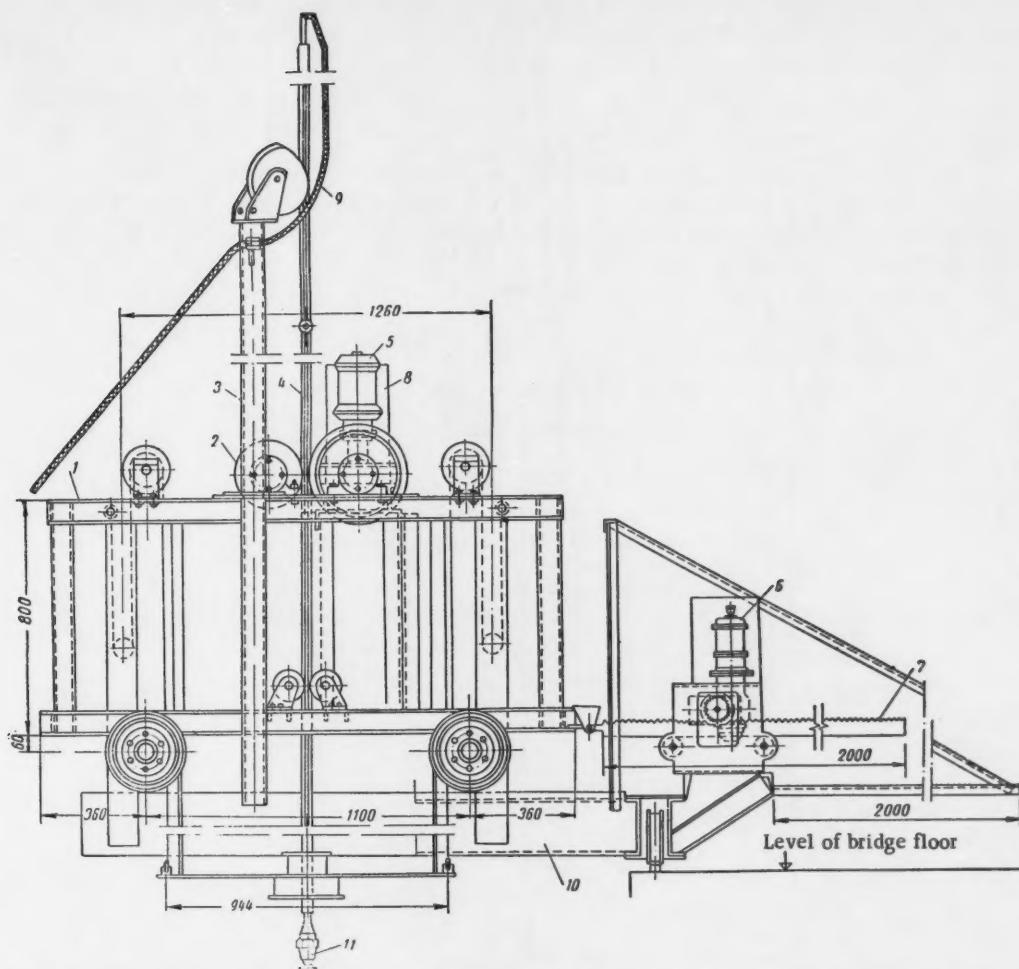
Machine for lubricating molds: 1) upper trolley; 2) block for moving sprays; 3) pillar for mounting slide roller; 4) metal tube; 5) executive mechanism for moving spray; 6) executive mechanism for transverse movement of the upper trolley; 7) rack; 8) track switch; 9) hose for delivering varnish; 10) bottom trolley; 11) spray.
